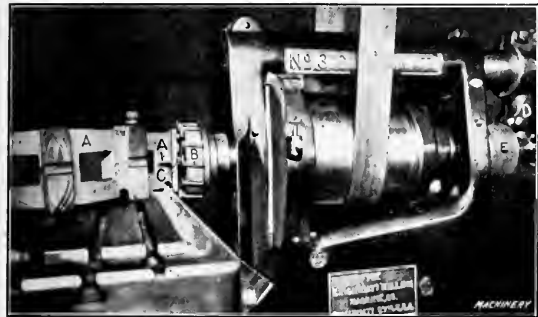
Two-speed Milling Attachment for machining Alternating-current Motor Body Castings
